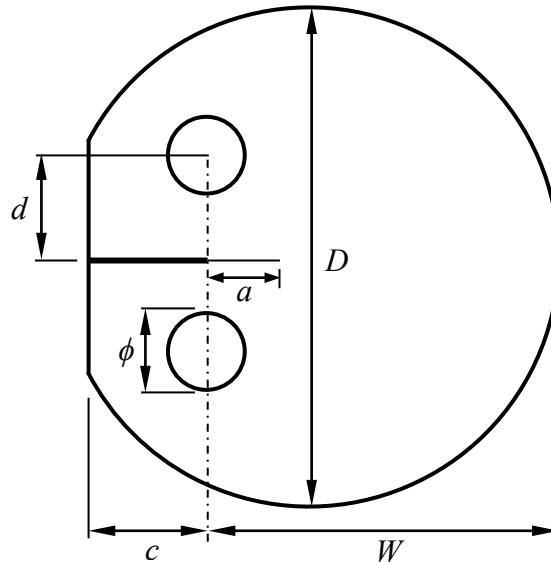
Disk-shaped Compact Tension Specimen Geometry
